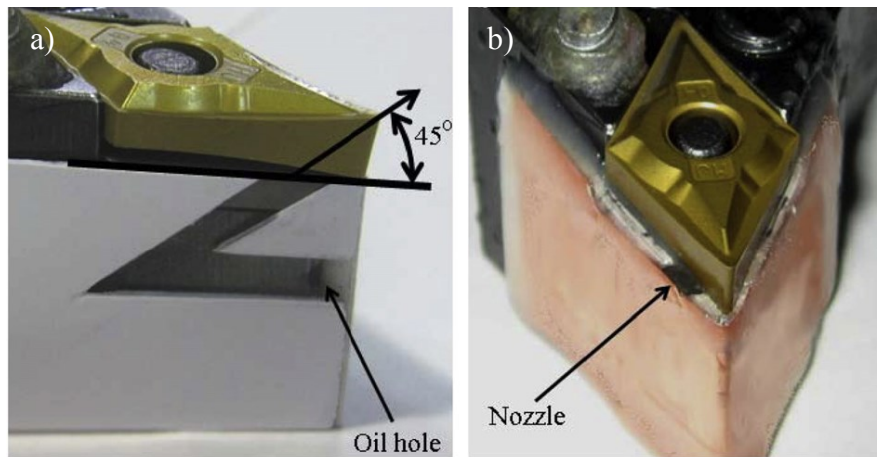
Special nozzle for oblique spraying (a) tool without a cover of copper sheet and (b) complete tool [77]
